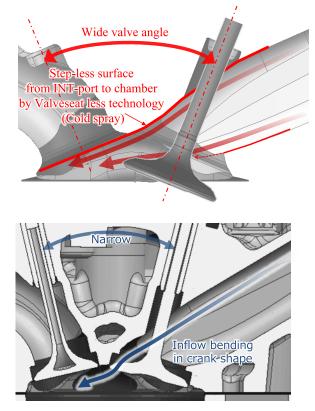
Comparison of design concept of intake port and combustion chamber (New design with cold spray valve seat (left), current design (right))
